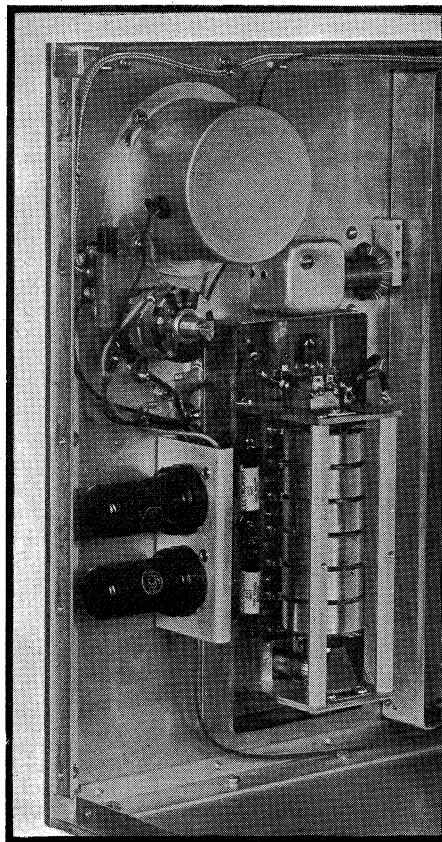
ASSEMBLY OF ATTENUATOR AND SWITCH ELEMENTS SHOWN IN FIGS. 11 AND 12
